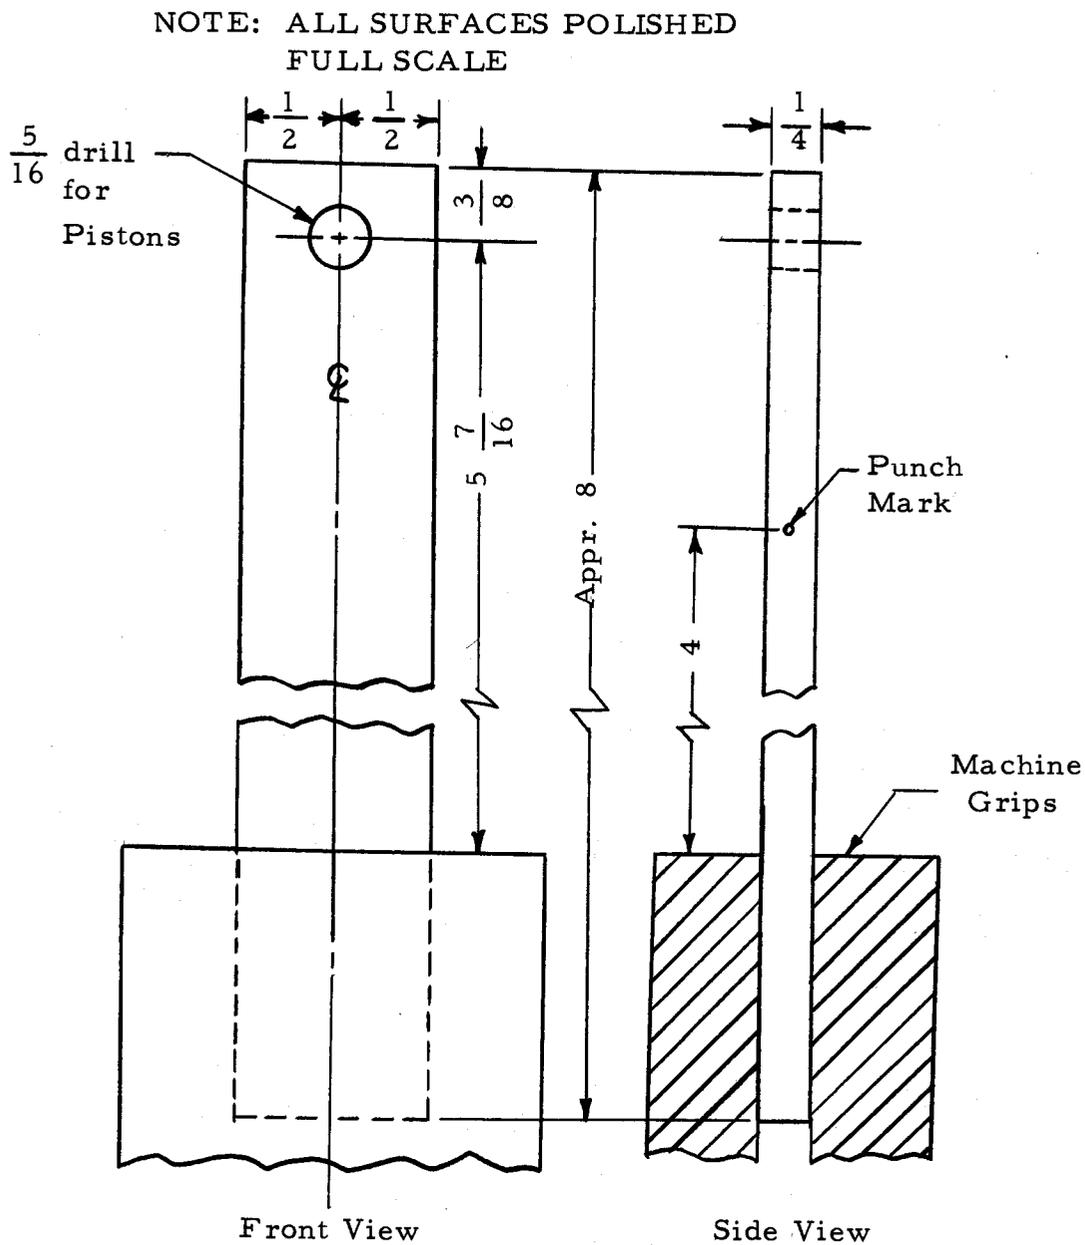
Rectangular cantilever fatigue specimen and specimen mounting.
